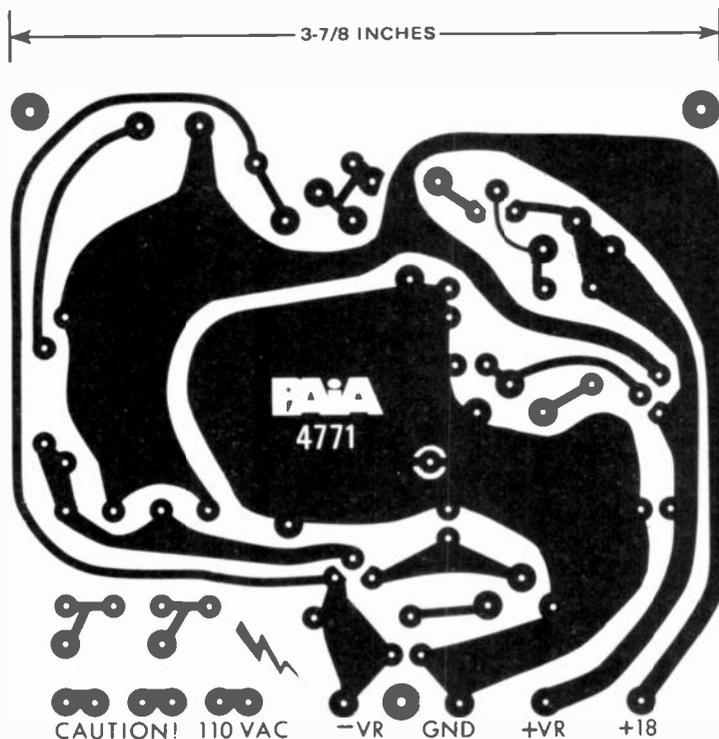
FOIL PATTERN for the power supply. The power transformer is mounted on the bottom of the case, in the left-rear corner next to the supply circuit board.
